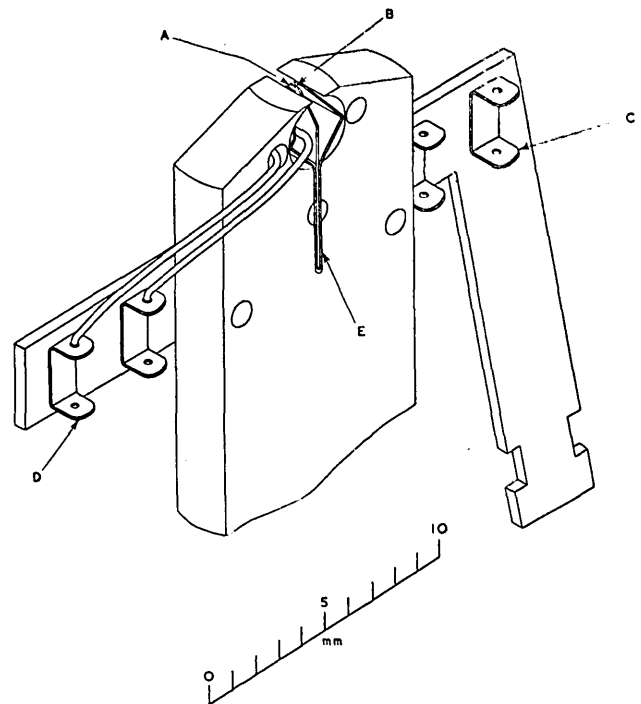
Details of the construction of the magnetic recording head, showing the two gaps used for reading and writing.
